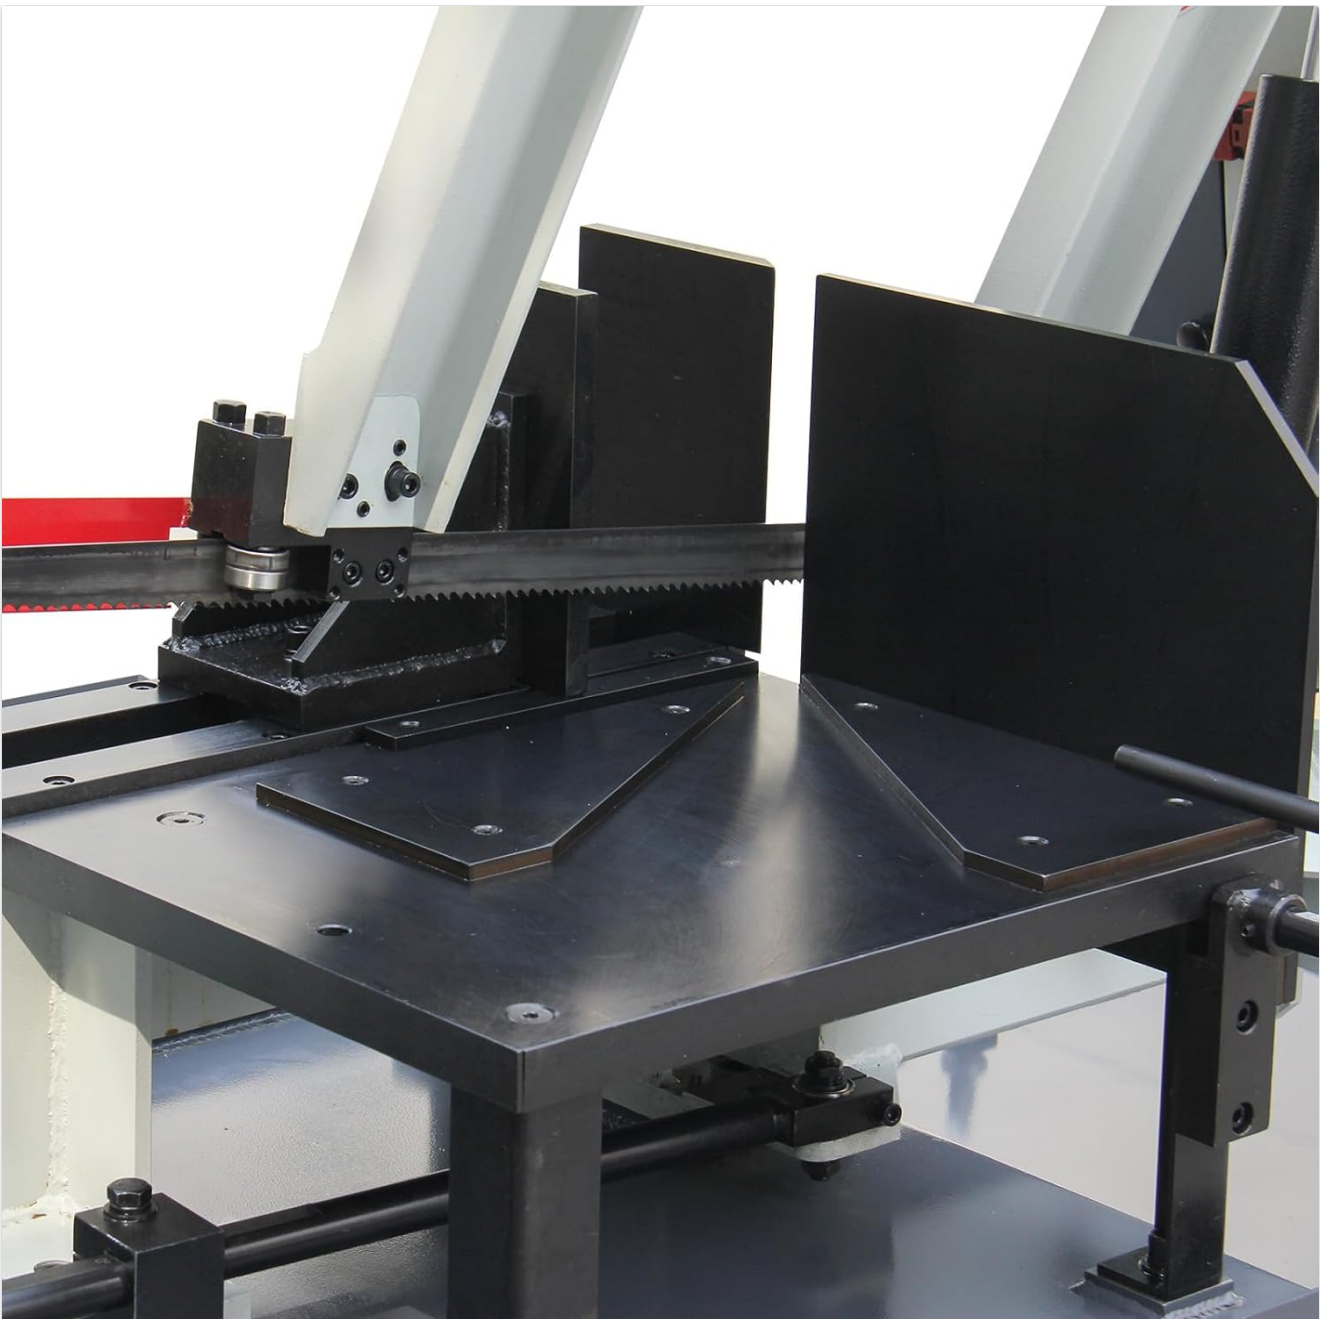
Detail of the cutting area and quick-lock vise. This image illustrates how material is secured for cutting, showing the blade path and the robust clamping mechanism.
